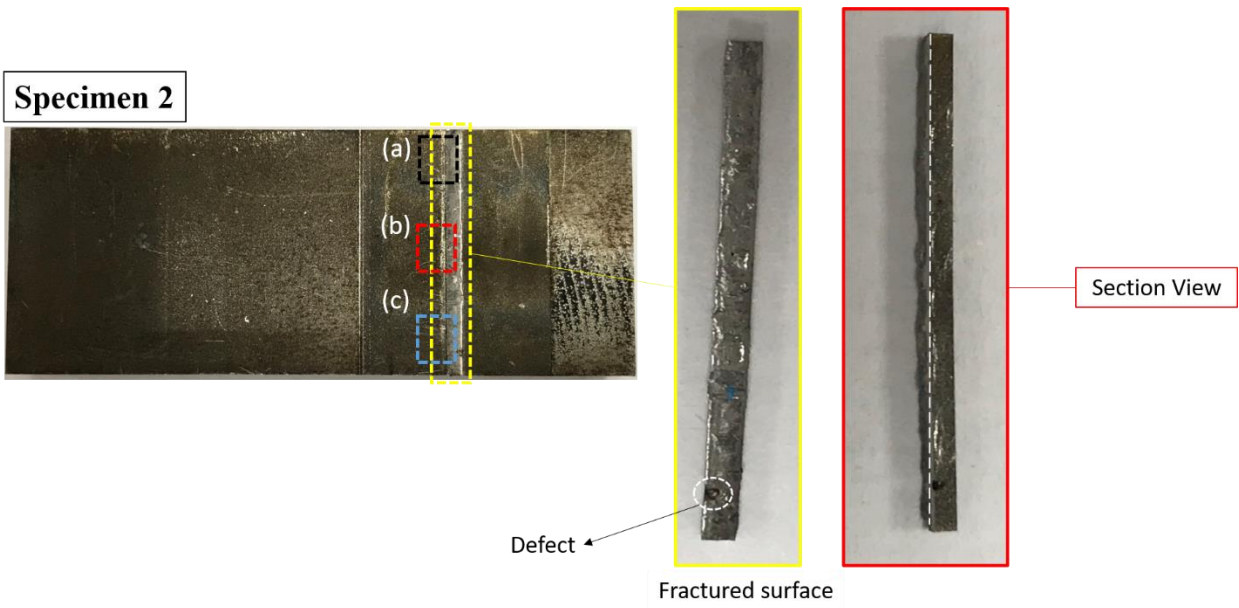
Optical micrographs – fracture surface morphology of shear test specimen (2)
